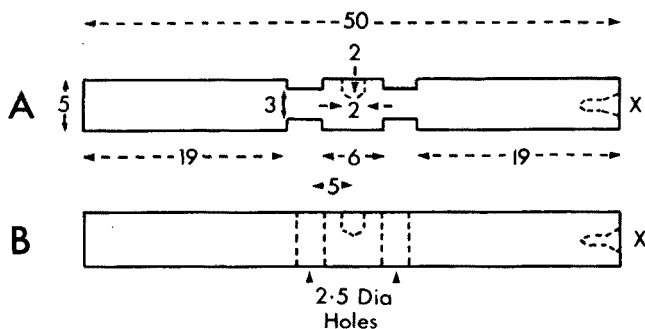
Diagram showing the form and dimensions (in mm) of carbon-rod (A) and carbon-rod (B). X, centre-drilled hole for machining in lathe.
